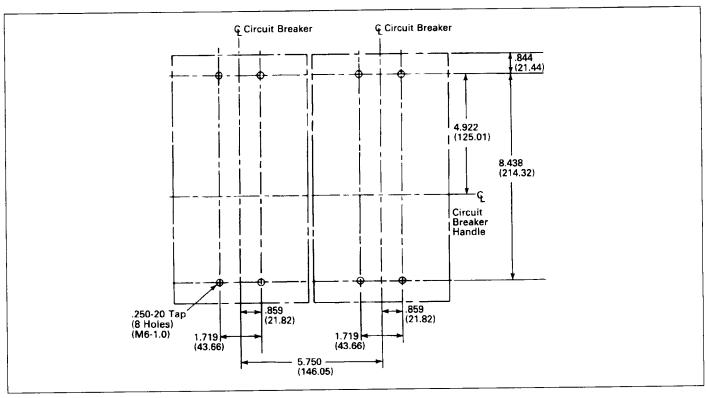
K-Frame Circuit Breaker Mounting Bolt Drilling Plan
